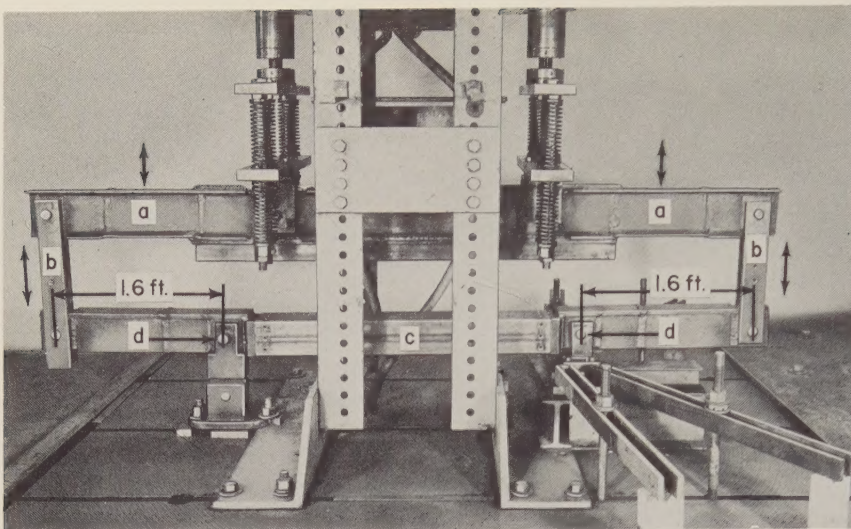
A specially designed stroking machine was used to perform bending tests on the resistance seam welded side rail. A 1,300-lb up and down stroking load, applied by the beam (a) to each vertical link (b), produced a bending moment of 2,080 ft-lb which was distributed over the entire length of a 32-in. long test specimen (c). The vertical links were positioned at a distance of 1.6 ft from ball bearing fulcrums (d). The upward and downward movement of the beam caused the vertical links to move in a vertical motion which, in turn, caused the test specimen to bend upward and downward.
